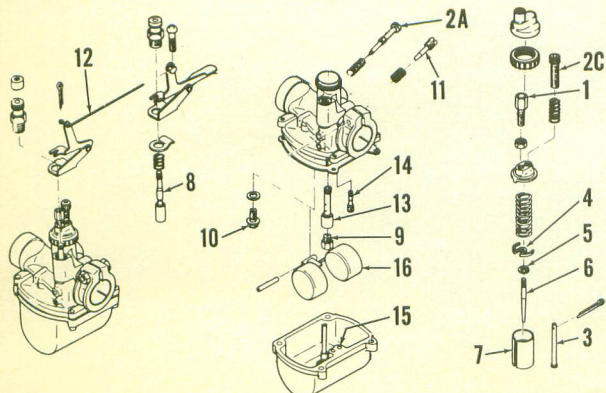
Exploded view of Mikuni VM carburetor used on early models. Starting valves for both carburetors are connected with rod (12).
